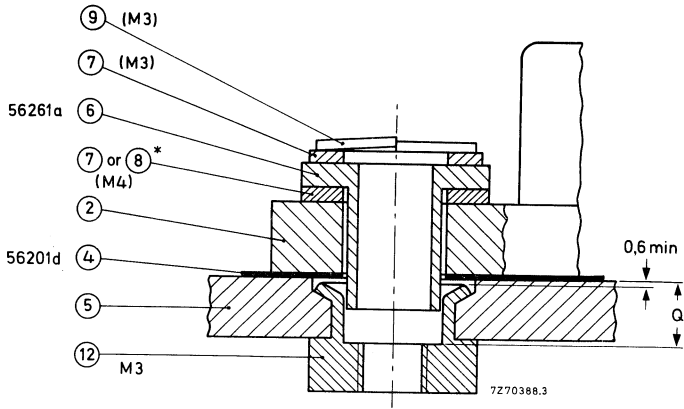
Assembly (partial) for Fig. 10 - insert nuts Q minimum 2,5 mm.
